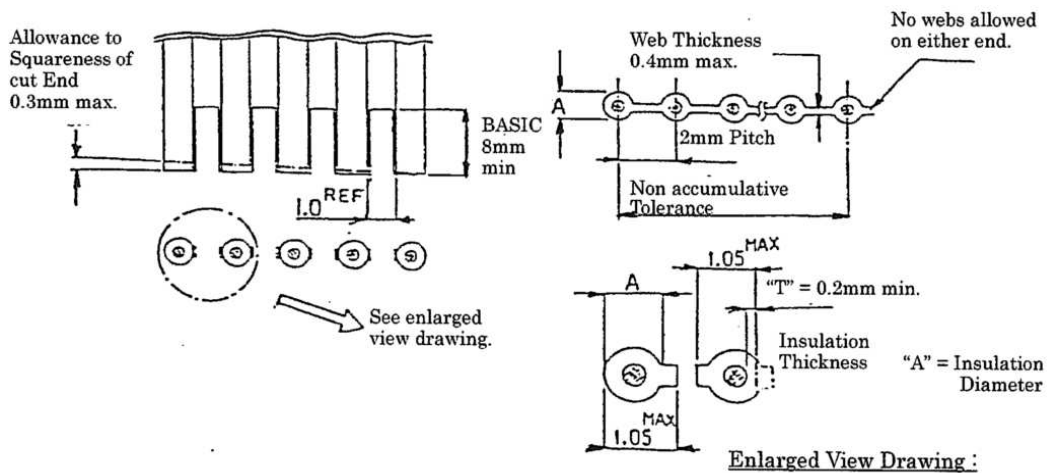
"U" cut Slitting on Flexible Flat Ribbon Cables.
